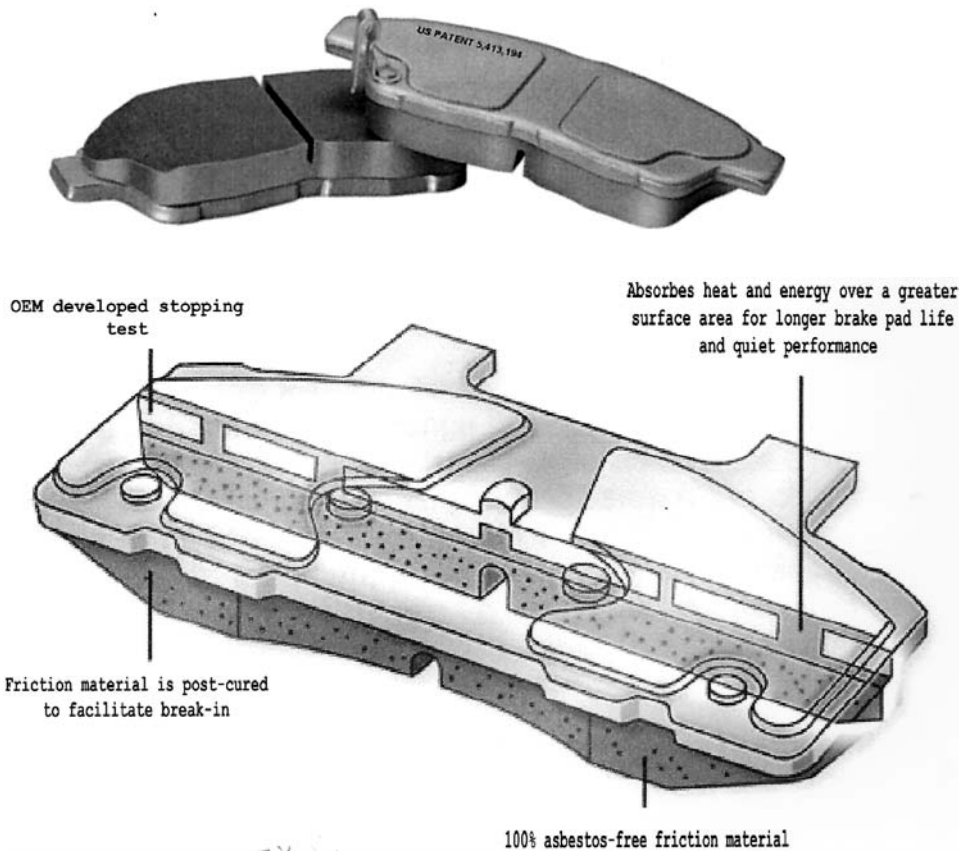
Photograph and cross section of a ThermoQuiet brake pad. (Courtesy Wagner Brake Products, Federal-Mogul Corp., Southfield, MI.)
